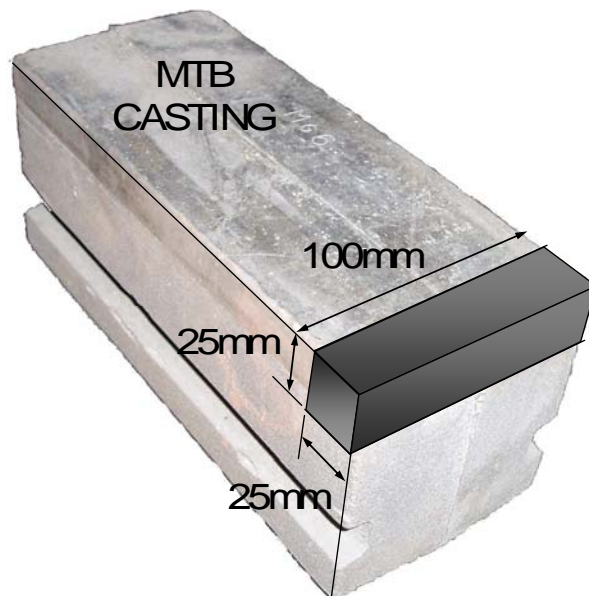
MTB casting illustrating the location and dimensions of a typical test bar blank (100mm x 25mm x 25mm). A total of 44 test bars were extracted from each MTB. A CNC operated lathe was used to machine the test blanks to ASTM-E-8M specification.
